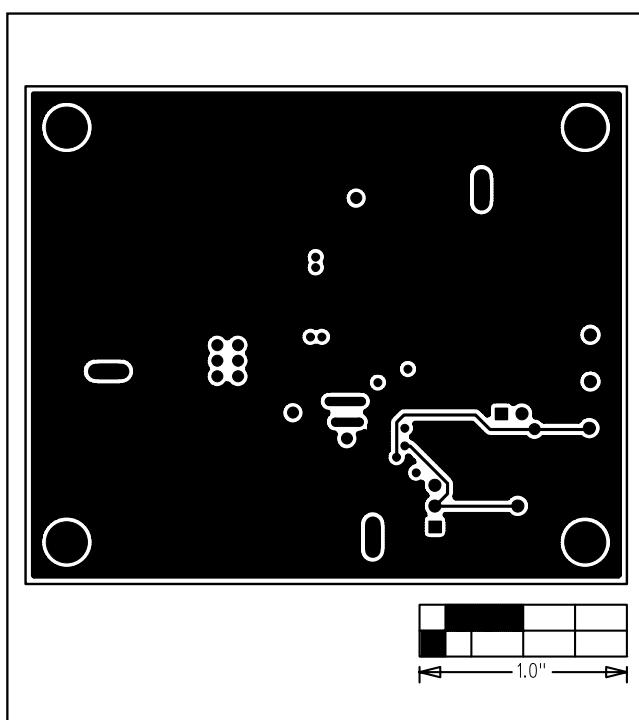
MAX17024 EV Kit PCB Layout—GND Layer 3
